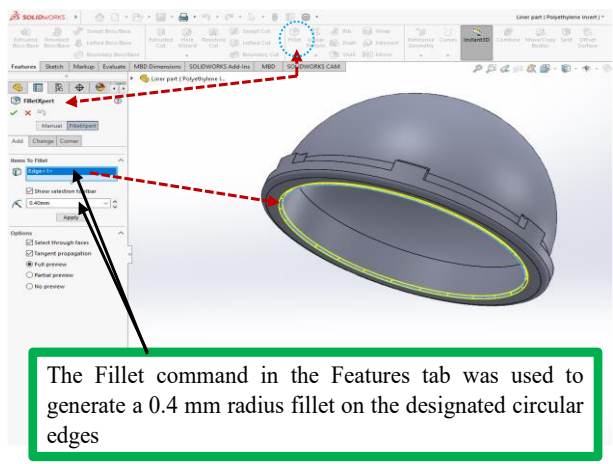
Applying a 0.4 mm-radius fillet to the lower outer edge of the liner component
